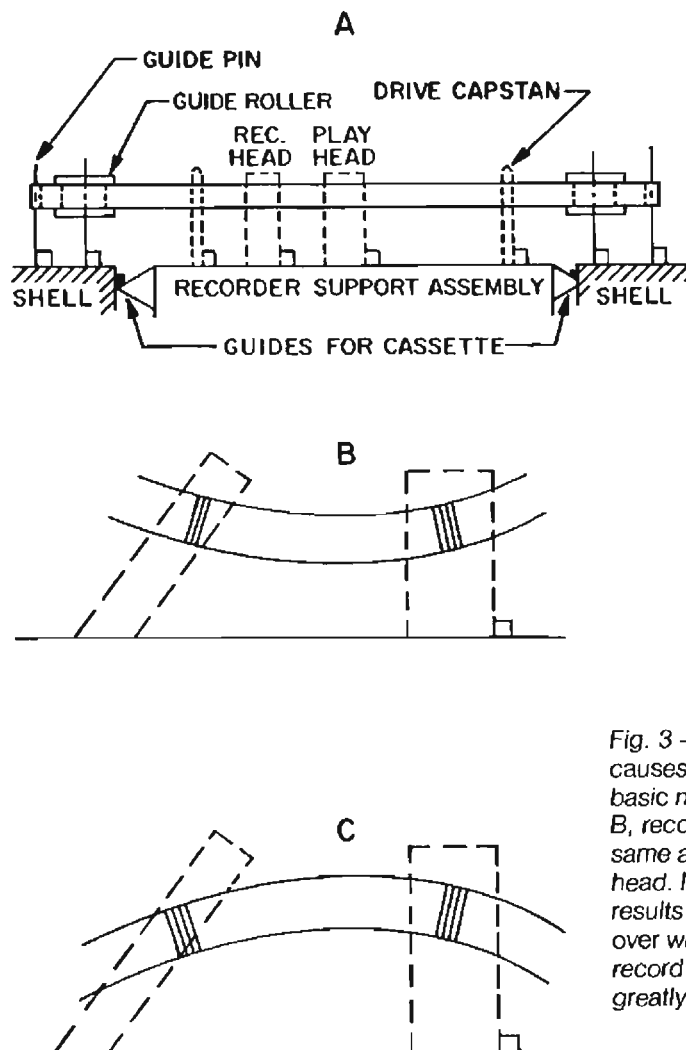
How tape skewing causes alignment errors. A, basic mechanical interface. B, record head adjusted for same angle with tape as play head. Note skewing tape. C, results from turning cassette over without readjusting the record head. The effects are greatly exaggerated for clarity.
